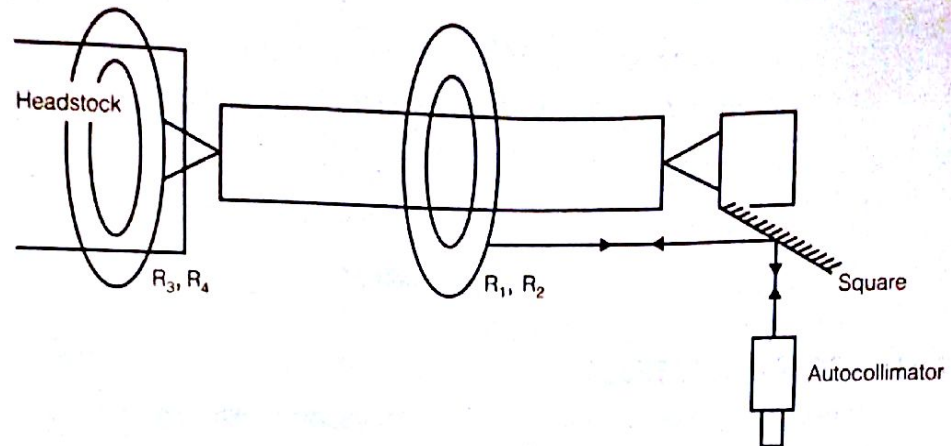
(i) : Work axis parallel to spindle axis (1st test)
